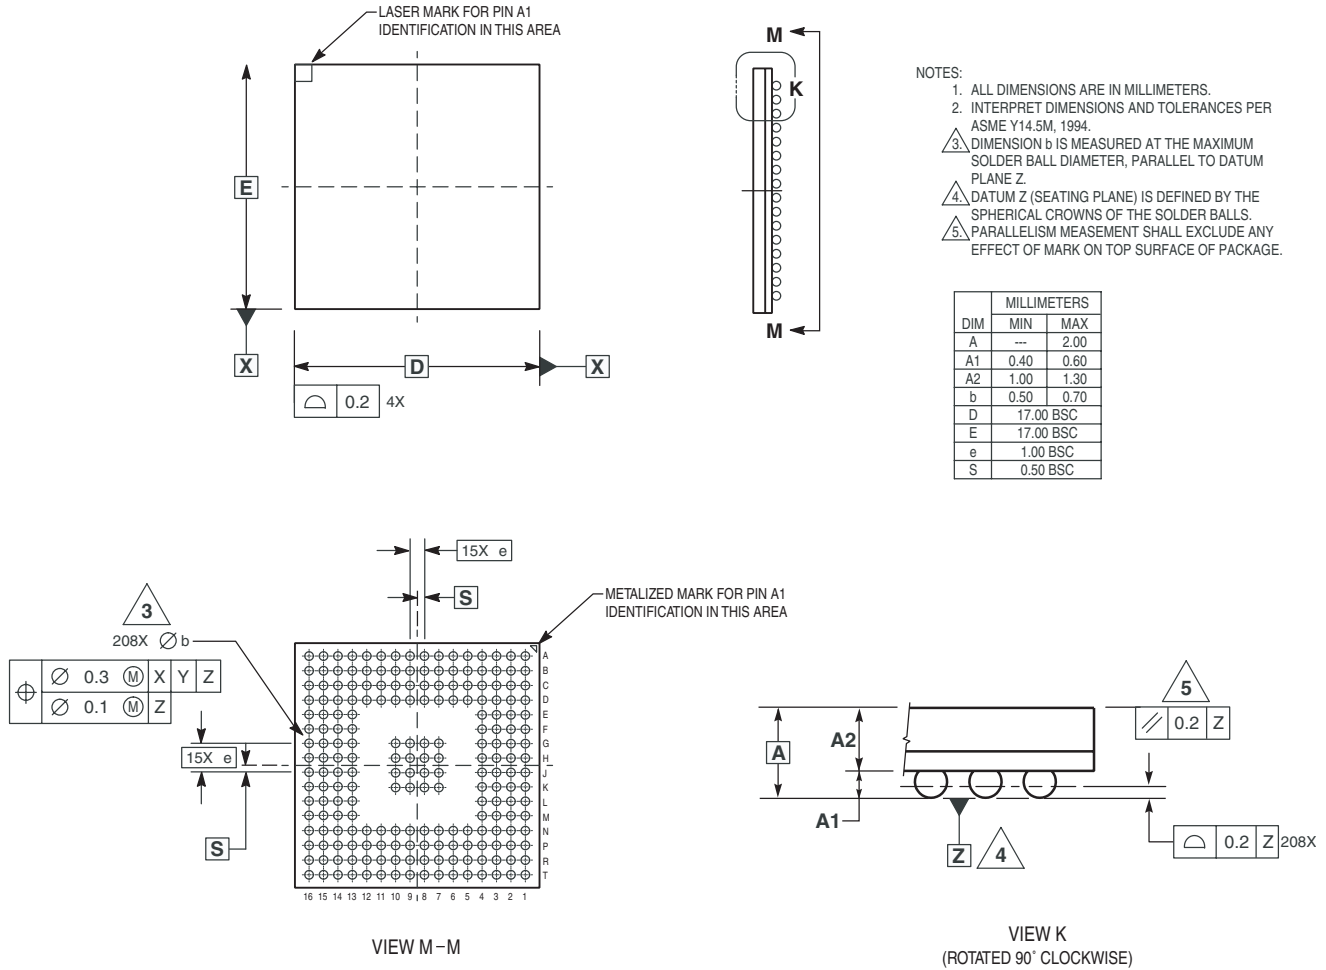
208-Pin MAP BGA Mechanical Dimensions (Case No. 1159A-01)
